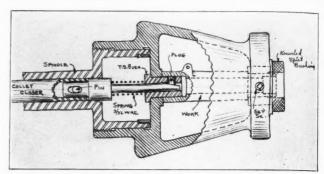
Sketch showing Partial Sectional View making more than One Illustration Unnecessary
